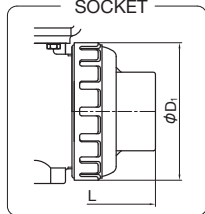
(DETAILS OF ENSAT FITTING MOUNTING HOLE)
